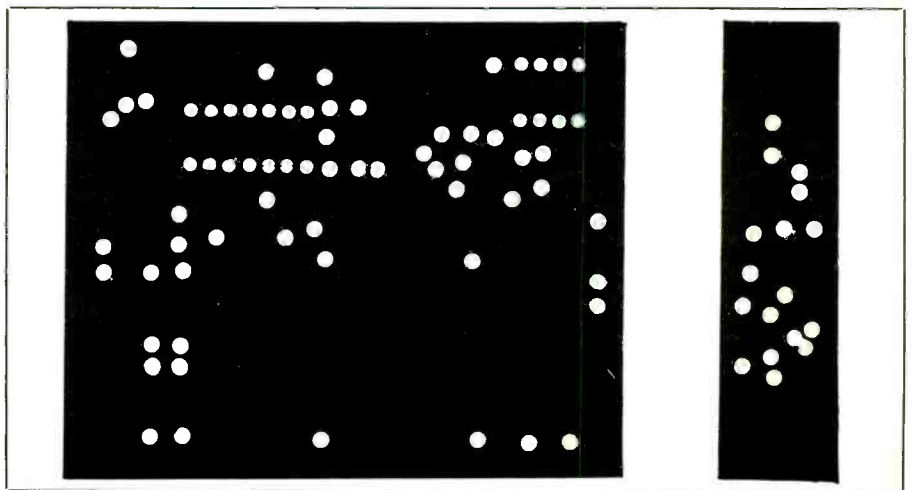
Top views of top (ground-plane) sides of receiver (left) and transmitter (right) pc boards showing holes that must be cleared of copper cladding.
